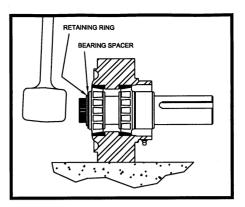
Final Assembly of Output Shaft Housing
